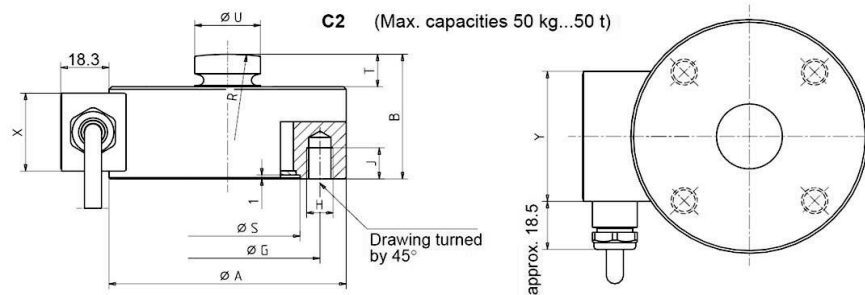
Structure and detailed dimensions (mm) of the C2 (HBM) weighing cell used in industrial measurements.
